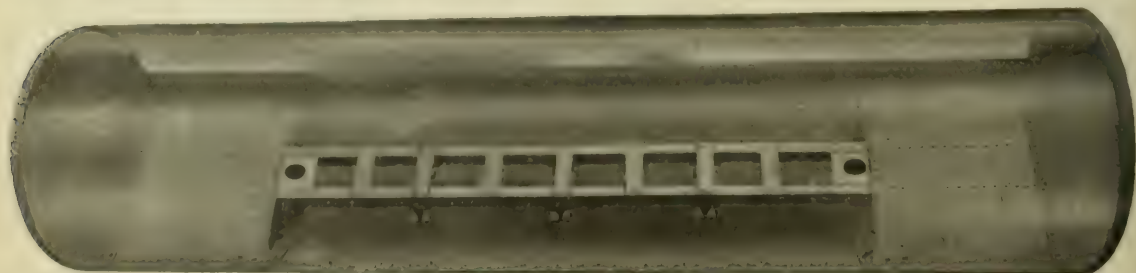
Interior View of Tank Car, Plan B, with 8-Inch Center Sills.
